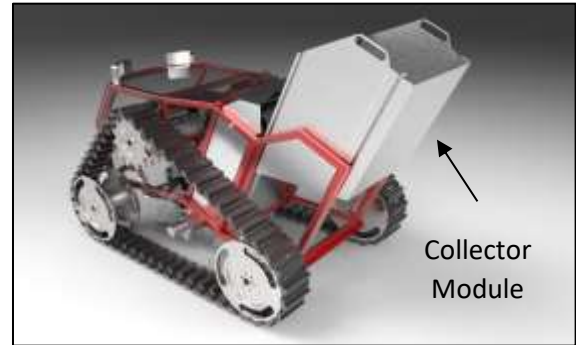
Conveyor Sub-Assembly with Enclosure
